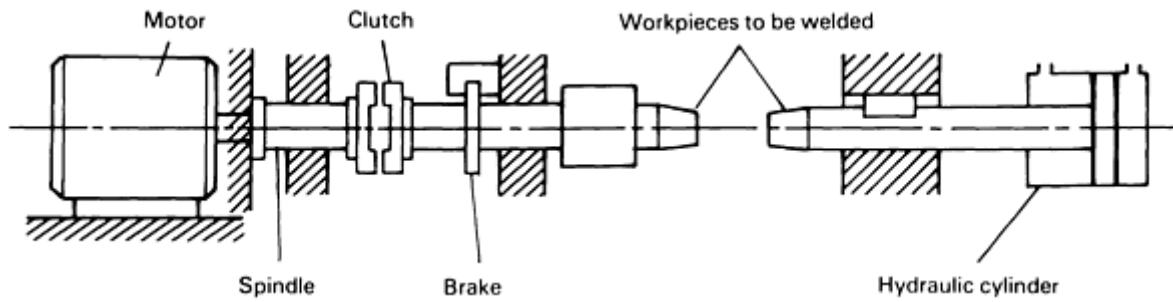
SCHEMATIC SHOWING RELATION OF WORKPIECES TO KEY COMPONENTS OF A DIRECT-DRIVE FRW SYSTEM. SOURCE: REF 1
